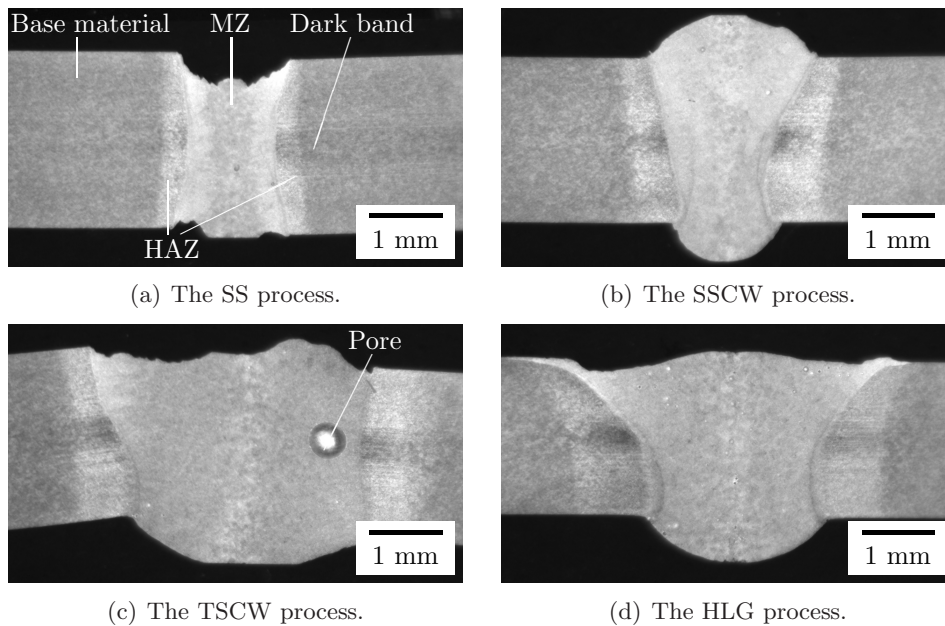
Photos of cross sections of the welds of the different processes for 2.1 mm thick AA5182 sheets.
